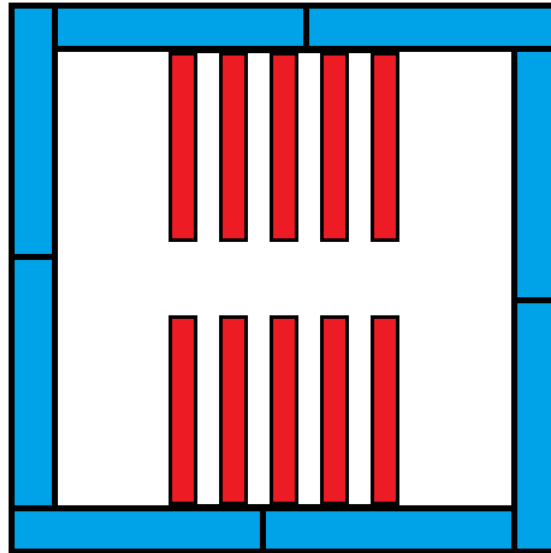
Arrangement of ferrite components in the construction of the prototype machine. I-cores are shown in blue. Modified E-cores are shown in red. Machine dimensions are discussed below.
